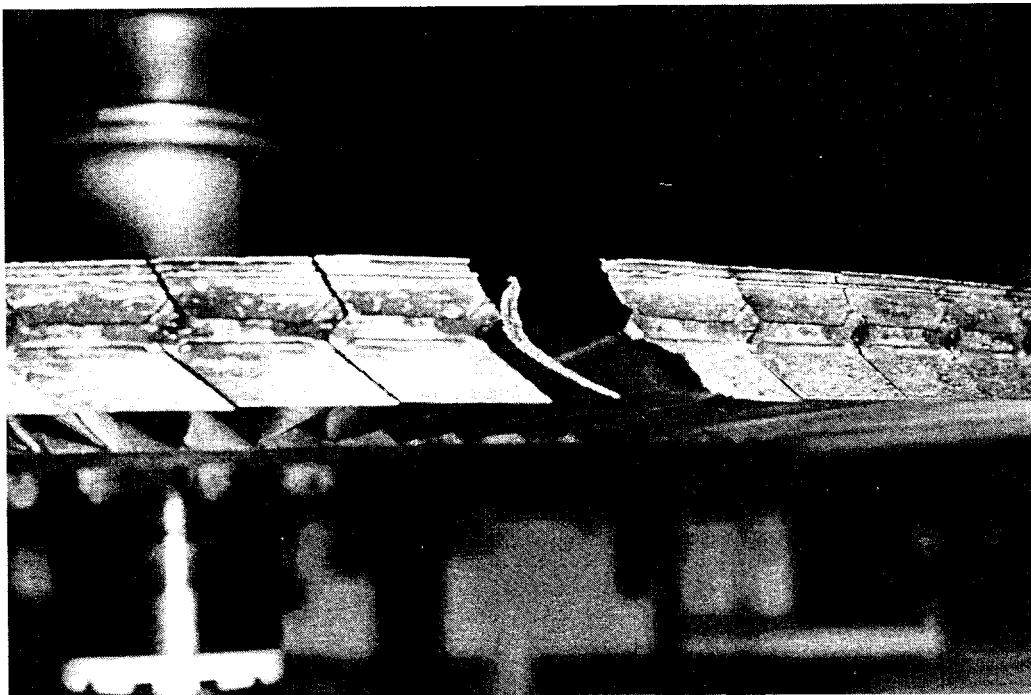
LP TURBINE BLADE WITH OUTER PLATFORM MISSING
